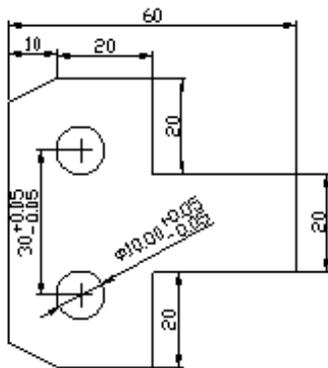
Example Component 1 (All dimensions are in mm, sheet material – Brass, sheet thickness – 1.0 mm)
